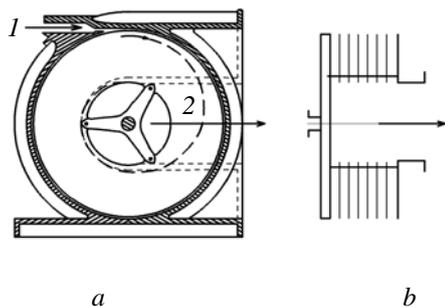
Scheme of the Tesla disk turbine: *a* – side view; *b* – disks in section; 1 – steam inlet to the nozzle; 2 – steam
